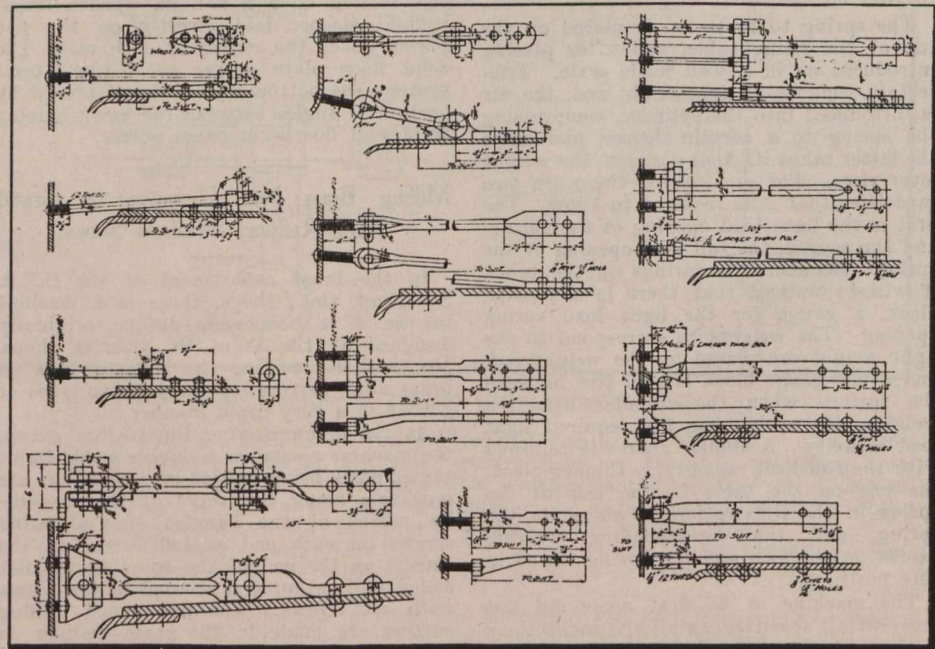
Twelve Styles of Throat Sheet Belly Brace.
